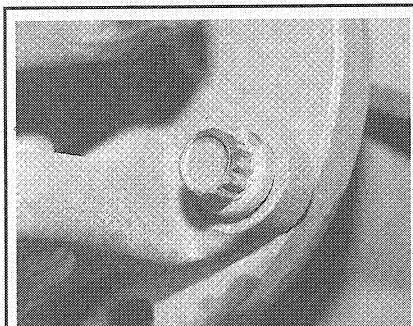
The bolts retaining the rear driveshaft yoke-to-differential flange require a 12mm, 12 point wrench or socket to loosen them
